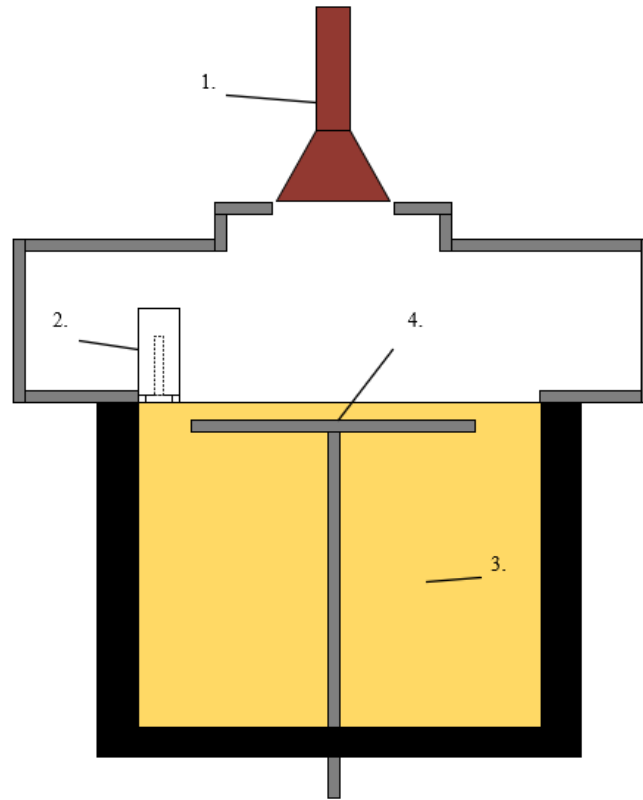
Top-Down Layout SLA 3D Printer, 1. UV Laser, 2. Recoater Blade , 3. Resin Vat, 4 & Printing Platform.
